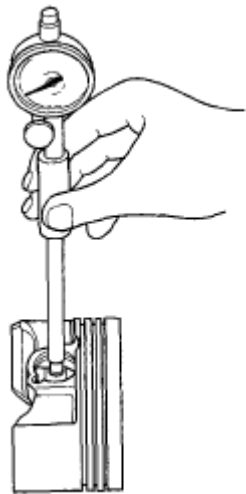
Checking Difference Between Piston Pin Diameter And Piston Pin Hole Diameter In Piston
